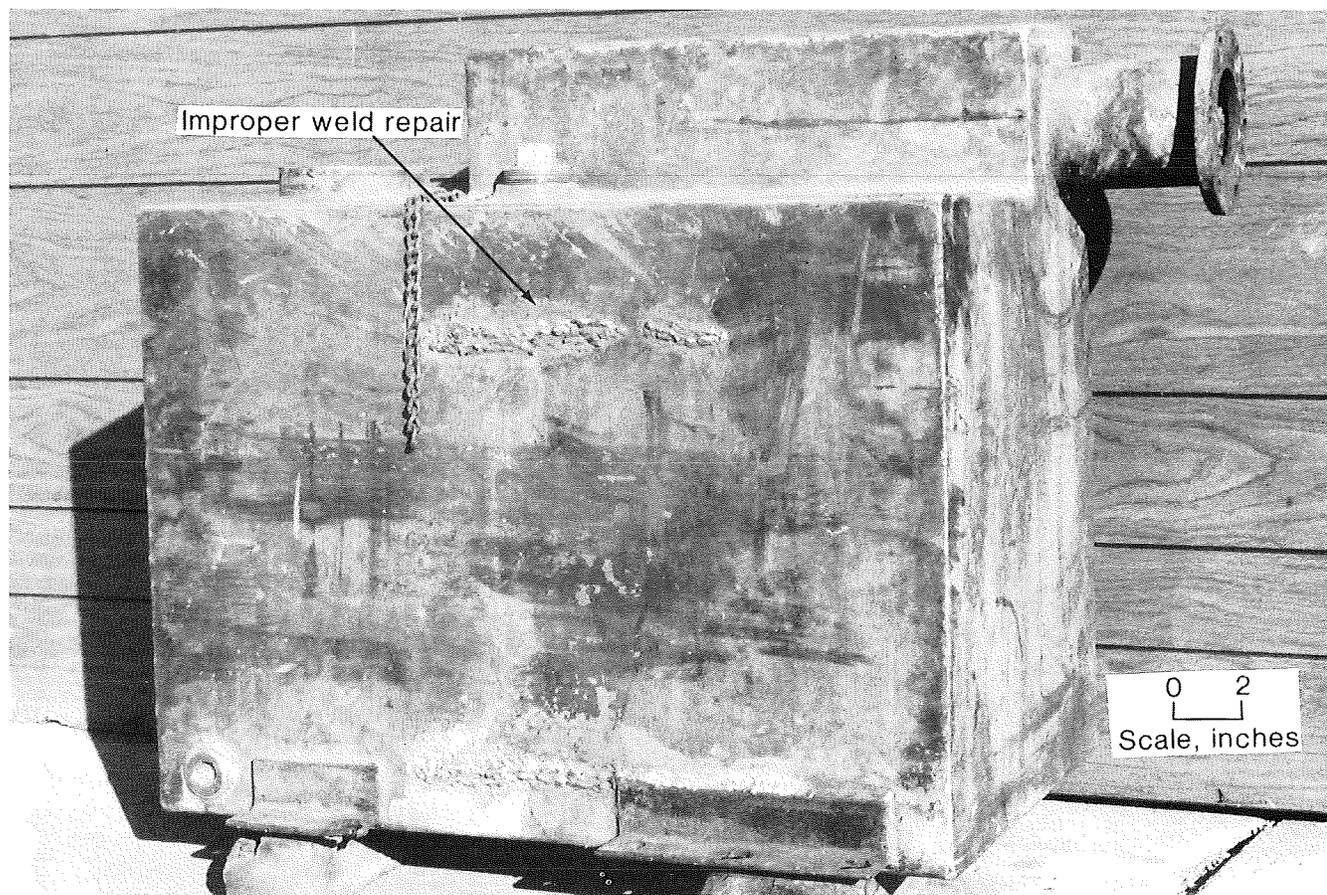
Exhaust water scrubber 3—batch-type—formed of type 304 stainless steel. Arrow indicates improper weld repair where mild steel filler material was used.
